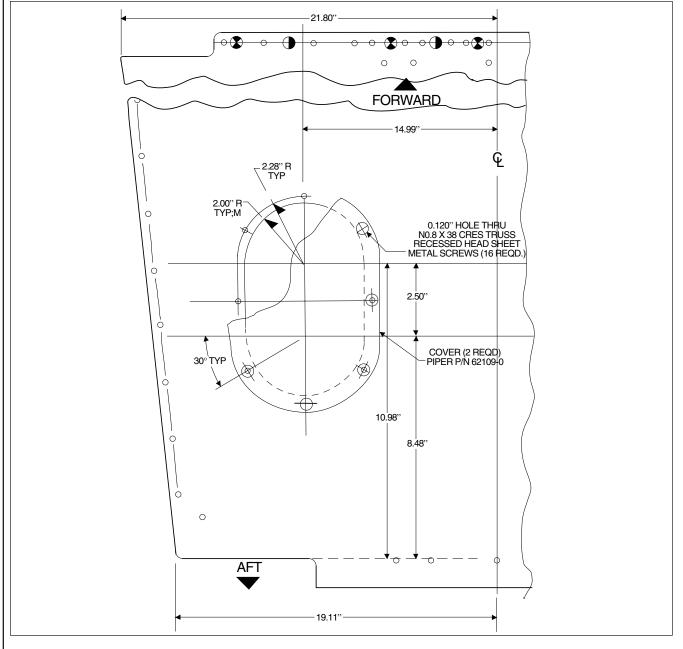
Baggage Compartment Inspection Holes Cutout Details
